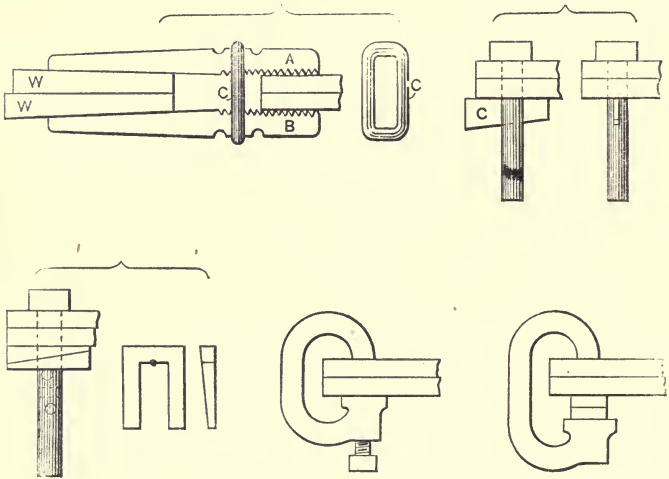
TO 82.—CLAMPING FLANGES, ETC.
